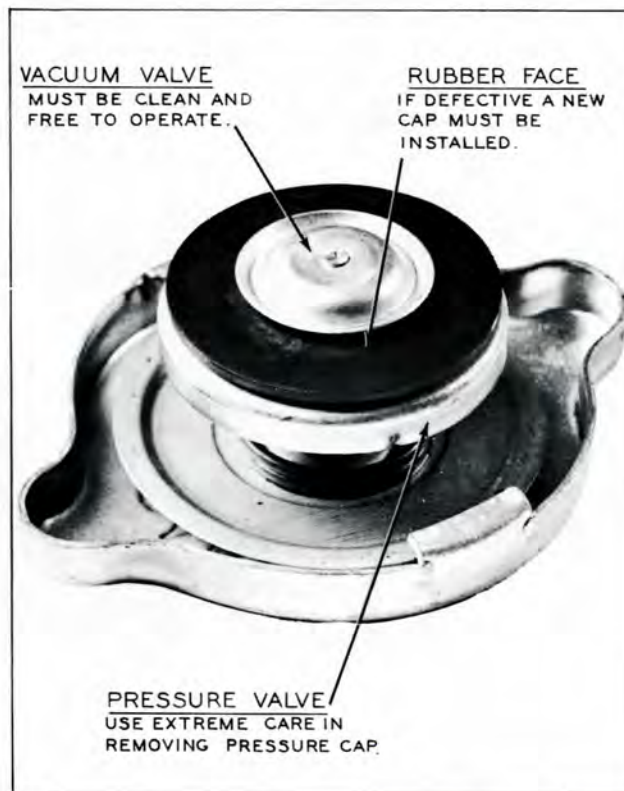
Pressure Cap Gasket, Valve and Valve Gasket
